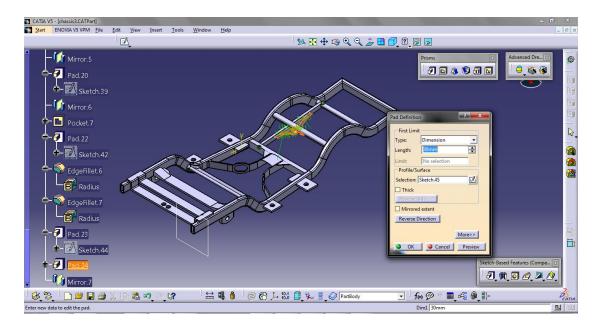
Used Pockets Tool For The Side Rails In Chassis
